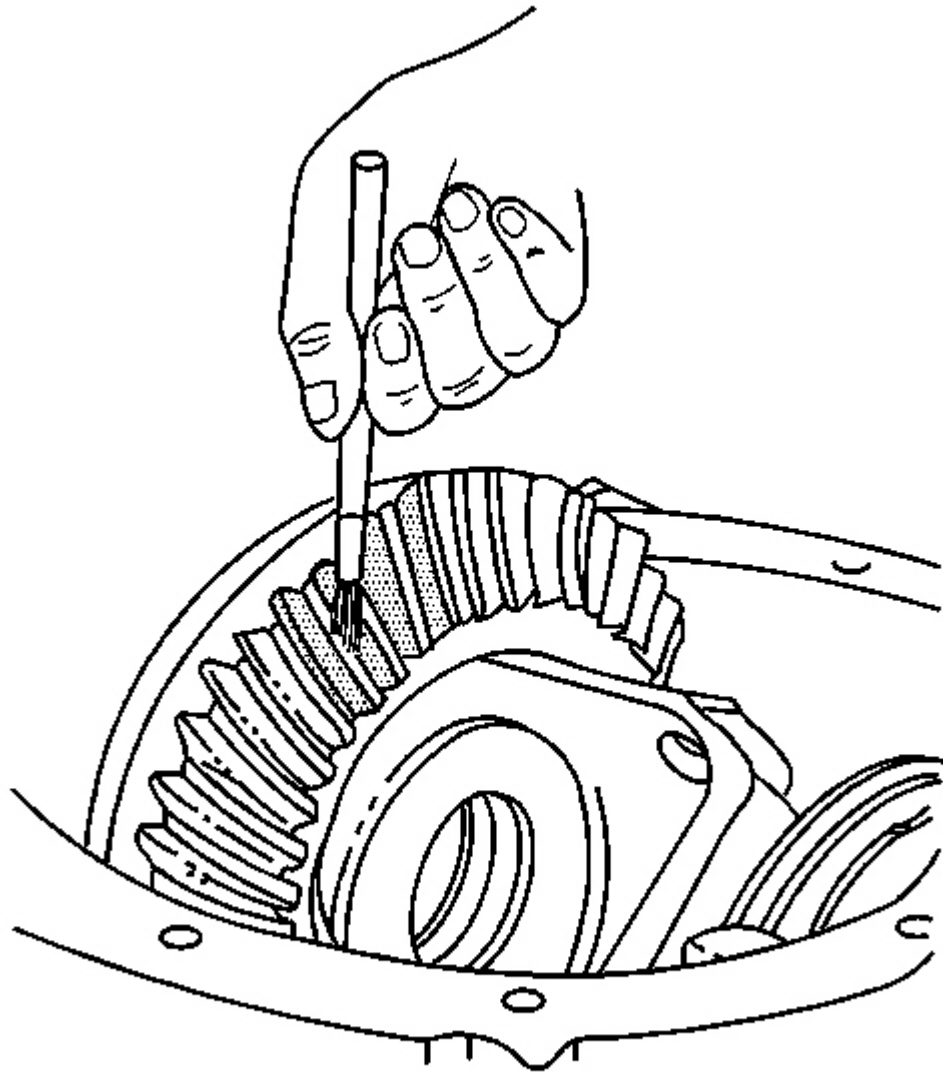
Applying Gear Marking Compound To Ring Gear Teeth
